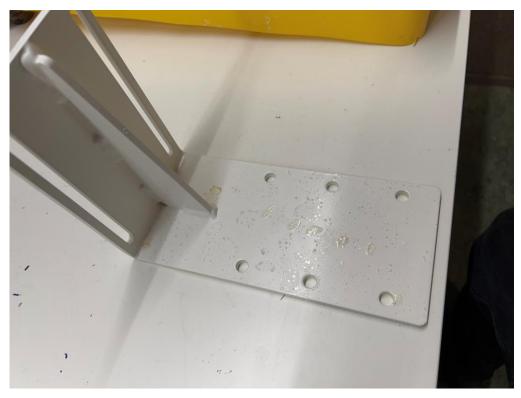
Visual inspection. (Wood/concrete mount P/N: 20032) slight coloration on repaired cracks, otherwise no change.
